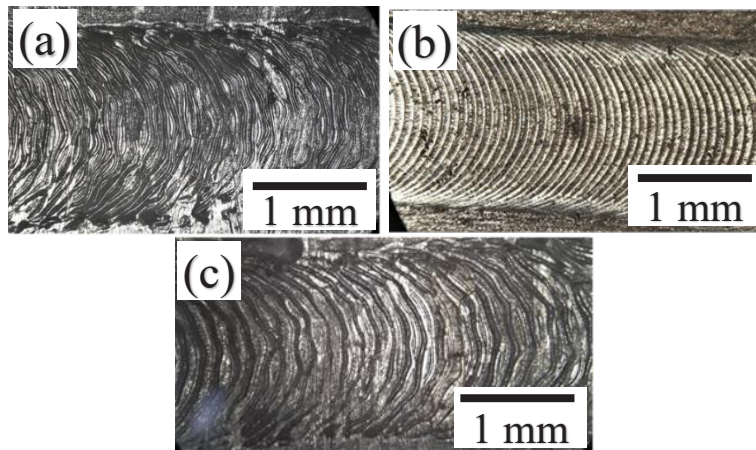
View of the weld surface (overlap) in samples (a) 250-v2-3, (b) 300-v2-3.5, and (c) 300-v3-3.5.
